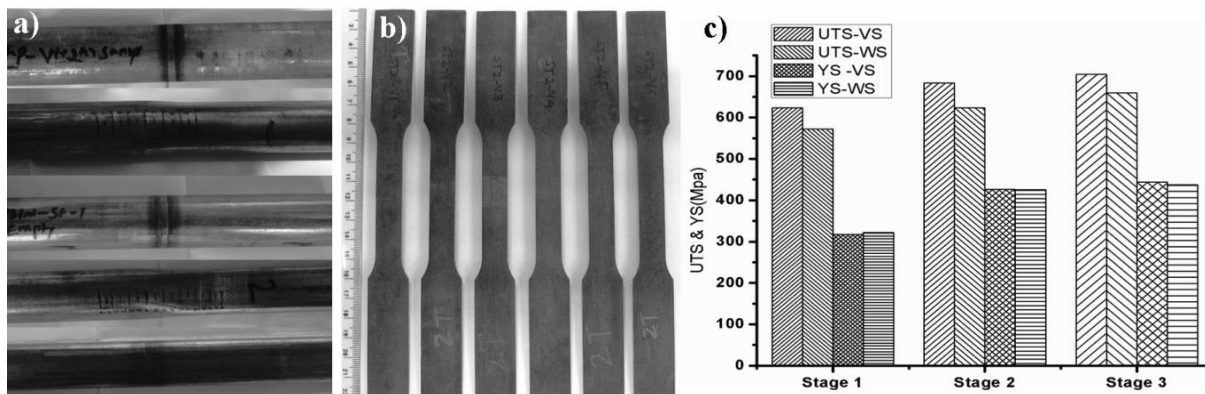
a) SS316LN jacket tubes after compaction and swaging b) Tensile samples from tubes c) UTS & YS of samples at room temperature (VS- sample without weld, WS-sample with weld)
